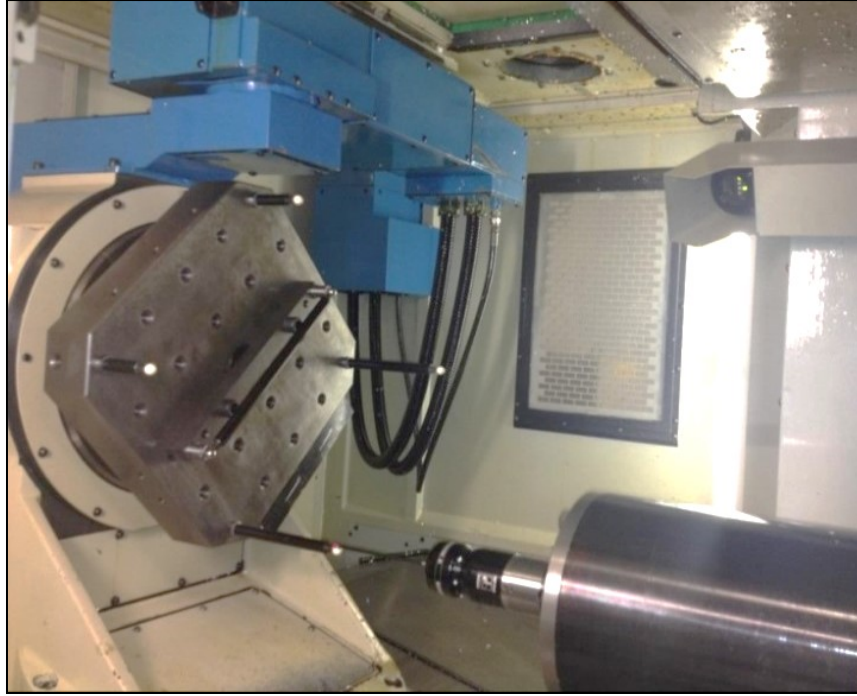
Scale and master balls being probed with a MP700 Renishaw probe on a Mitsui Seiki HU40-T machine tool
